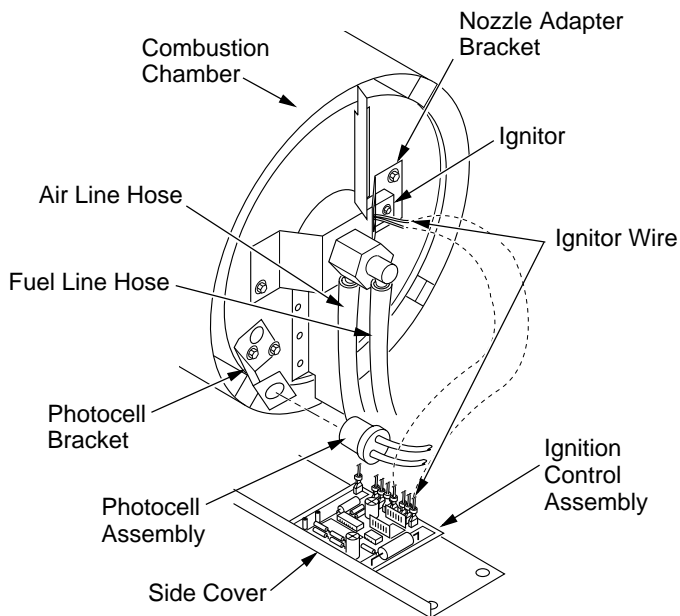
Disconnecting Ignitor Wires from Ignition Control Assembly (40/55/60/70/110/115/155/165 Models Shown)
